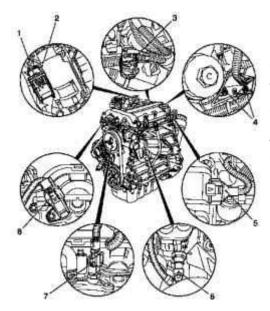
Disconnect power supply systems and engine control: 1 - connector wiring harness engine control module, 2 - fuse, 3 - zalushka 4 - the mass of wire, 5 - plug plug ignition module 6 - cap connector oil pressure sensor, 7 - plug connector sensor coolant temperature, 8 - plug connector camshaft sensor
